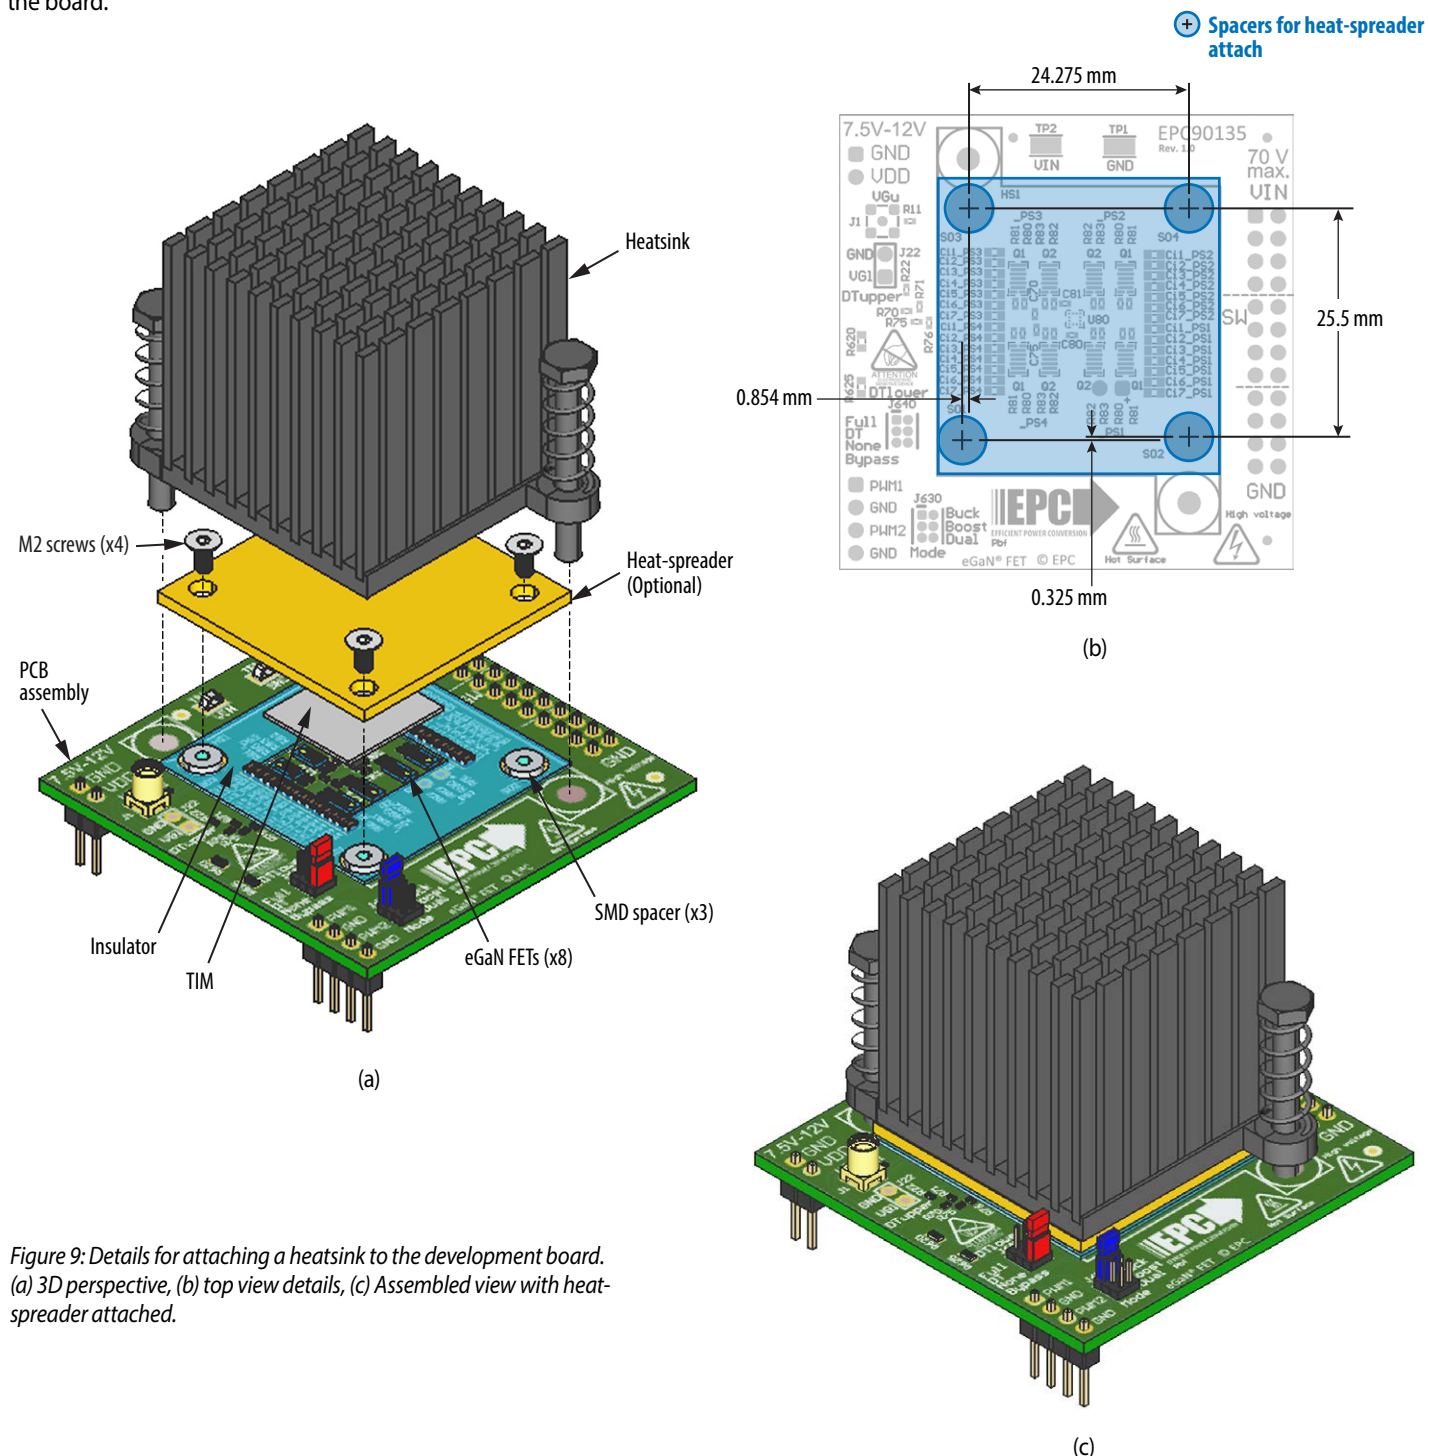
Details for attaching a heatsink to the development board. (a) 3D perspective, (b) top view details, (c) Assembled view with heat-spreader attached.
